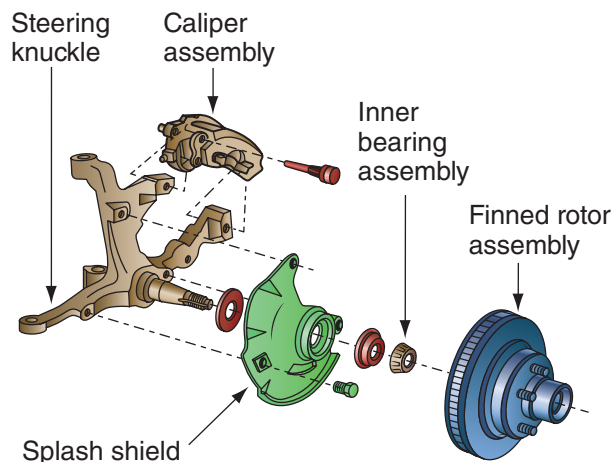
A splash shield protects the inboard side of the rotor.
